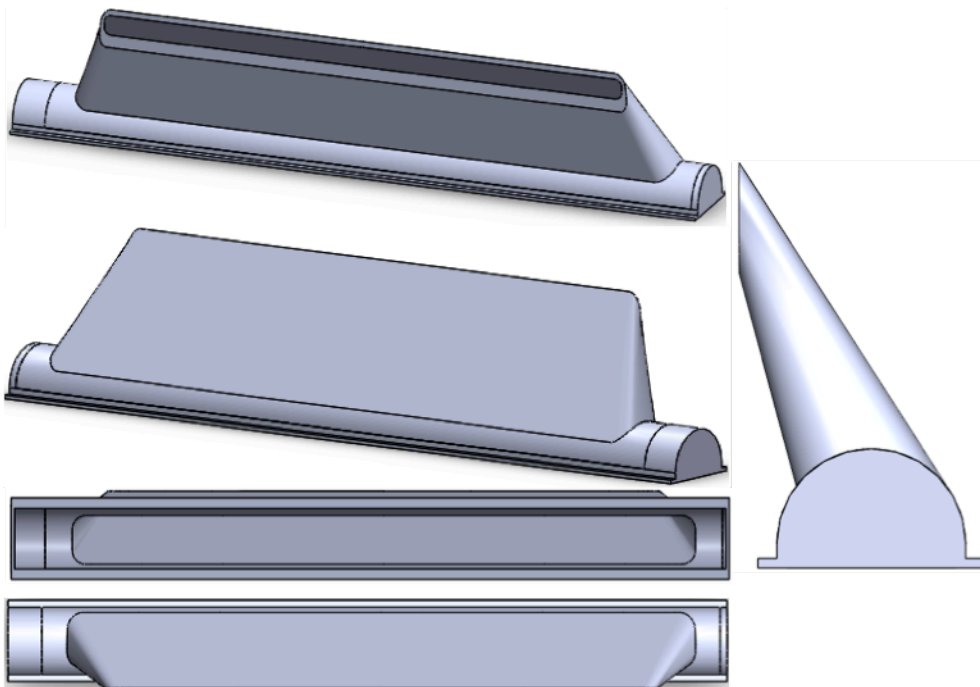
CAD OF BASIC HEAD GEOMETRY
